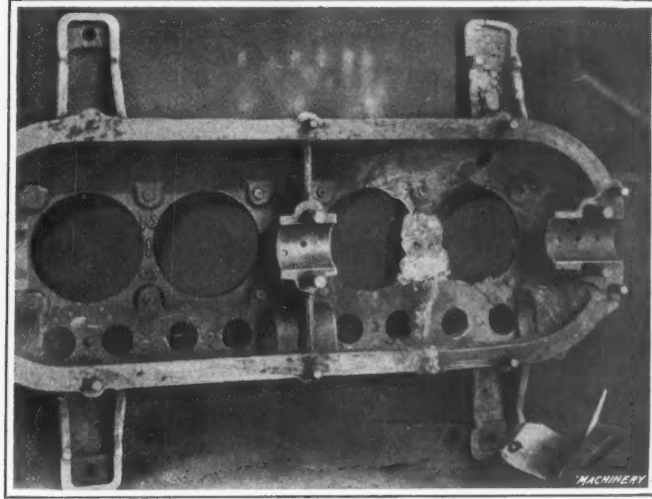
Bottom View of Crank-case shown in Fig. 1
